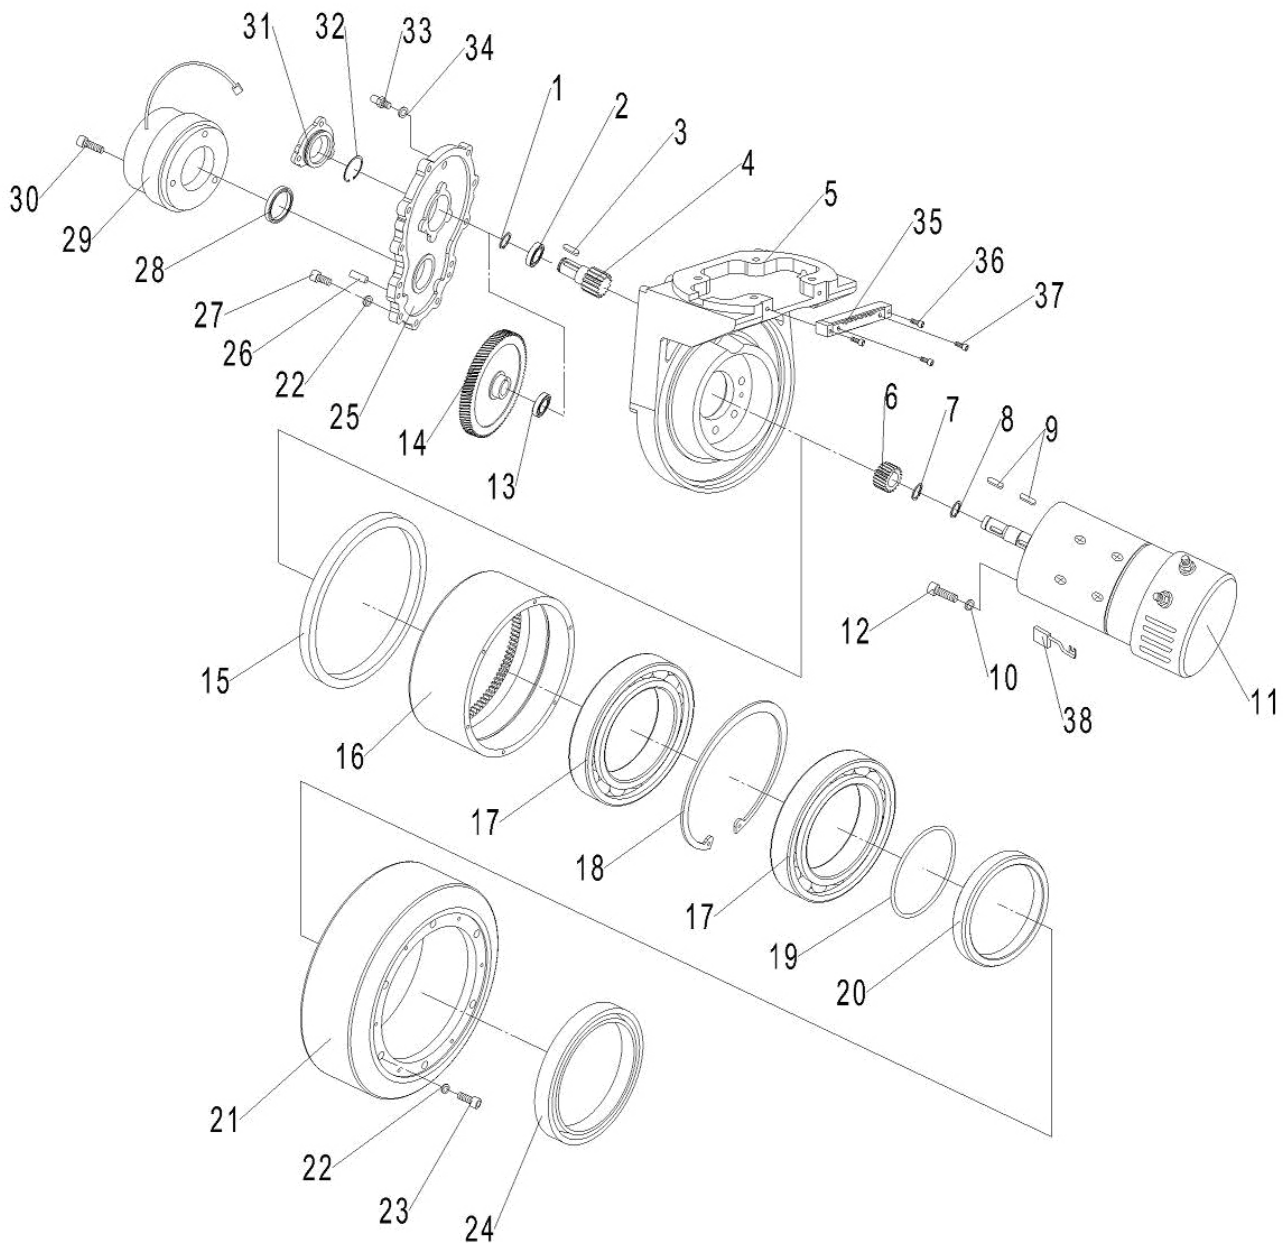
Repair Parts Illustration for Pallet Truck Drive Wheel (Model 2LEB8A)
